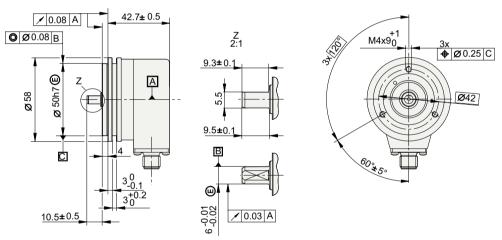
Dimension drawing of synchro flange, all data in mm
